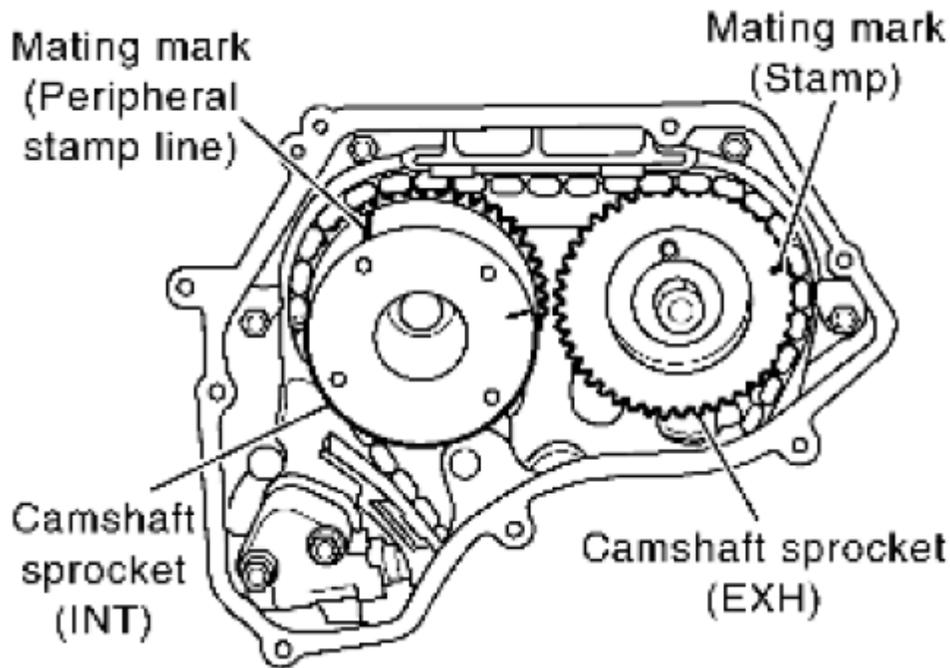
Identifying Mating Marks On Camshaft Sprocket
